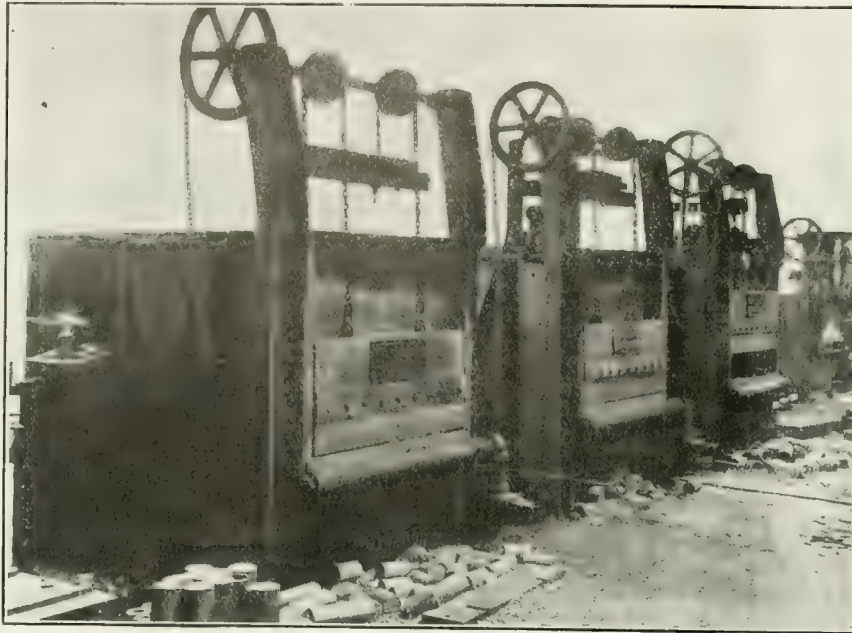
"MECHANICAL ENGINEERING CO." FURNACES FOR HEATING AND REHEATING BILLETS.
